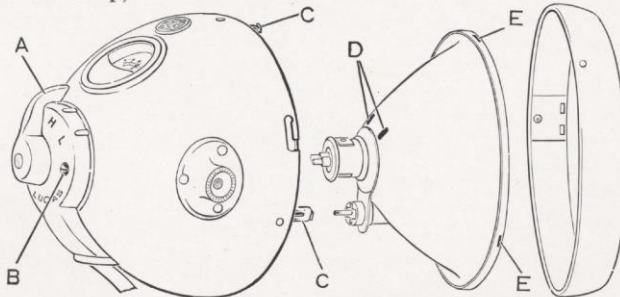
HEADLAMP TYPE H52 DISMANTLED.
